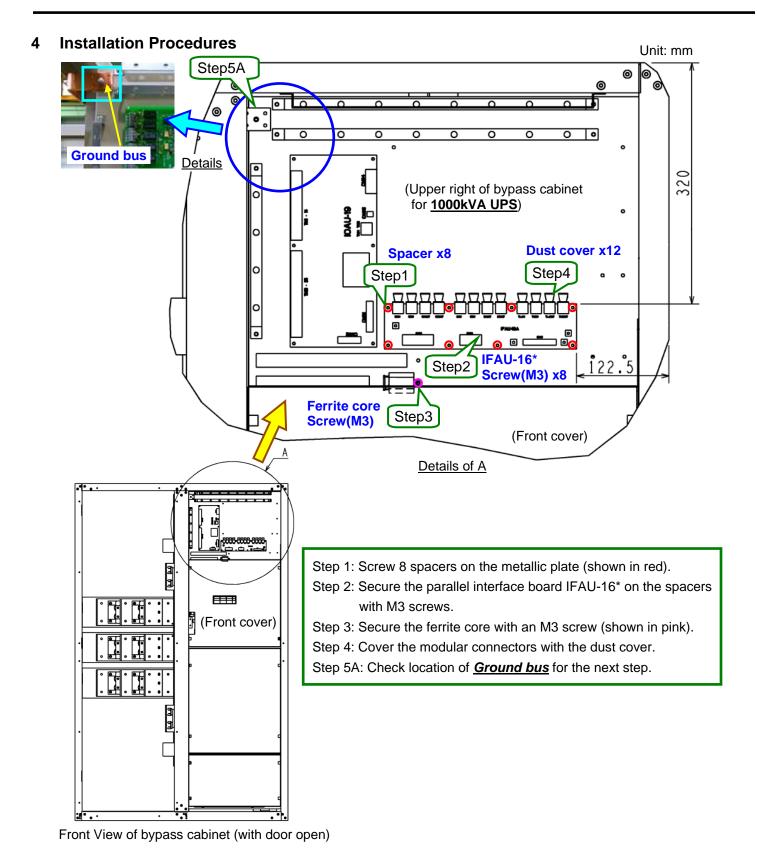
Location of IFAU-16* MMS PCB Installation (1000kVA)
